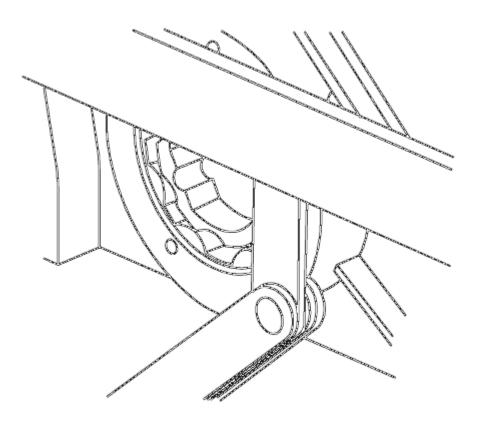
Inspecting Axial Clearance Courtesy of GENERAL MOTORS COMPANY
